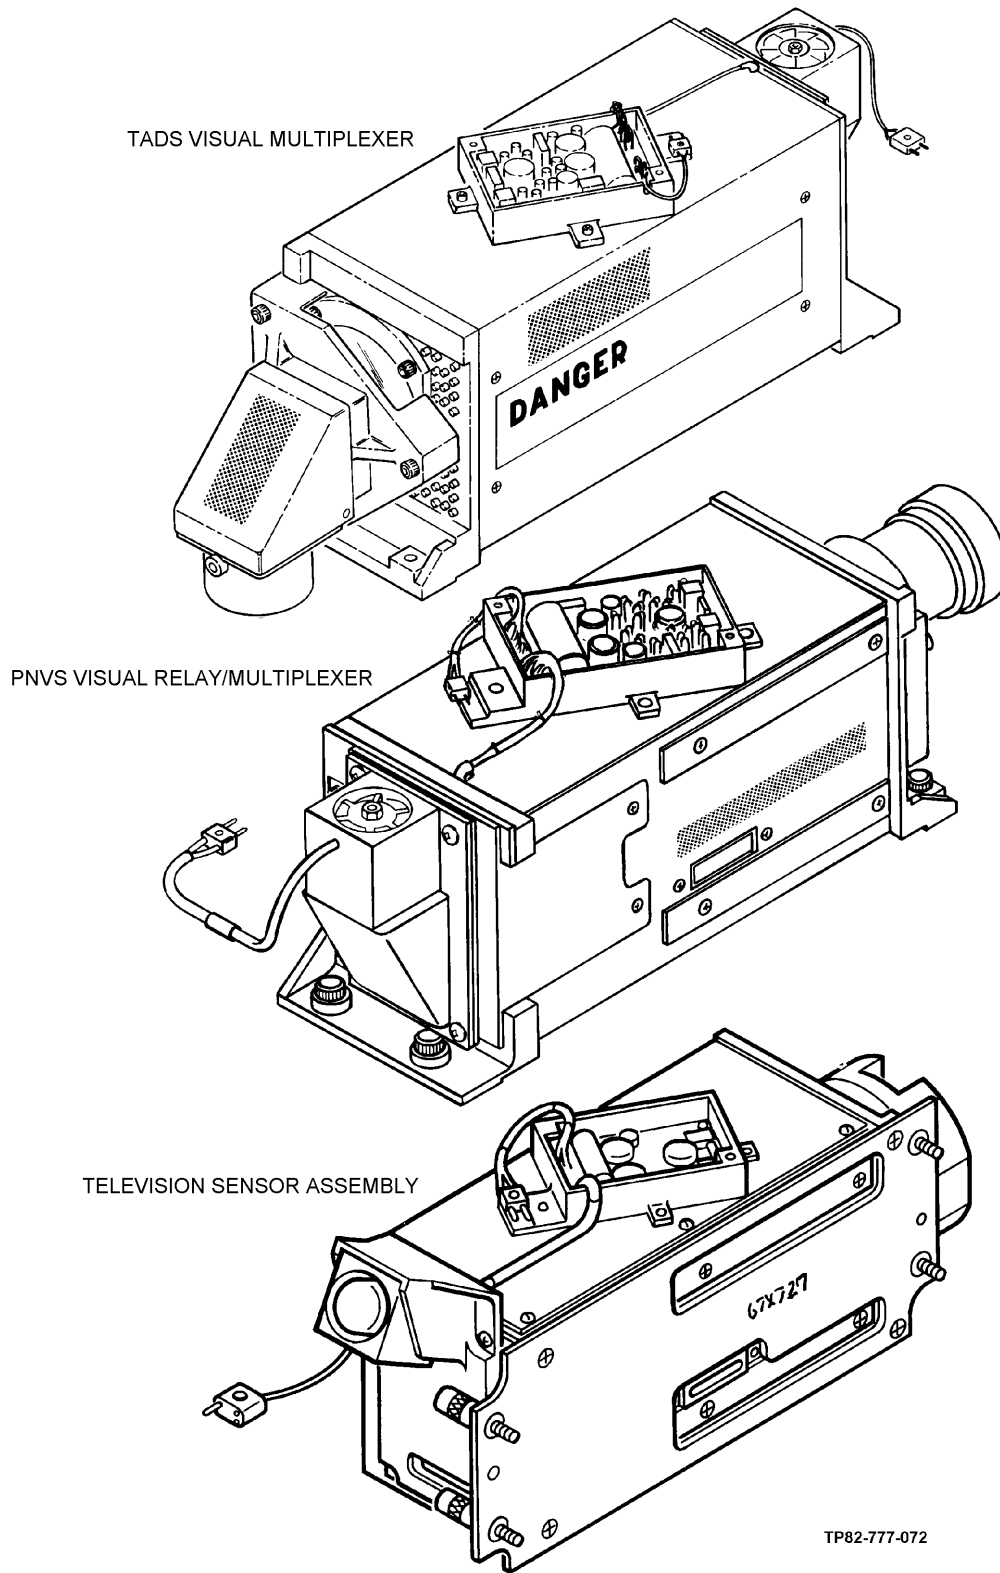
Television Sensor Assembly, Visual Multiplexer Assembly, and Visual Relay/Multiplexer Assembly
